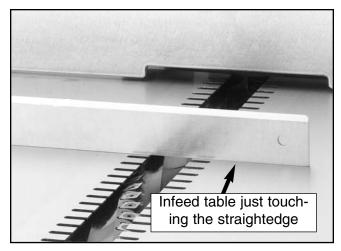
Properly adjusting the infeed table before setting the depth-of-cut scale.
